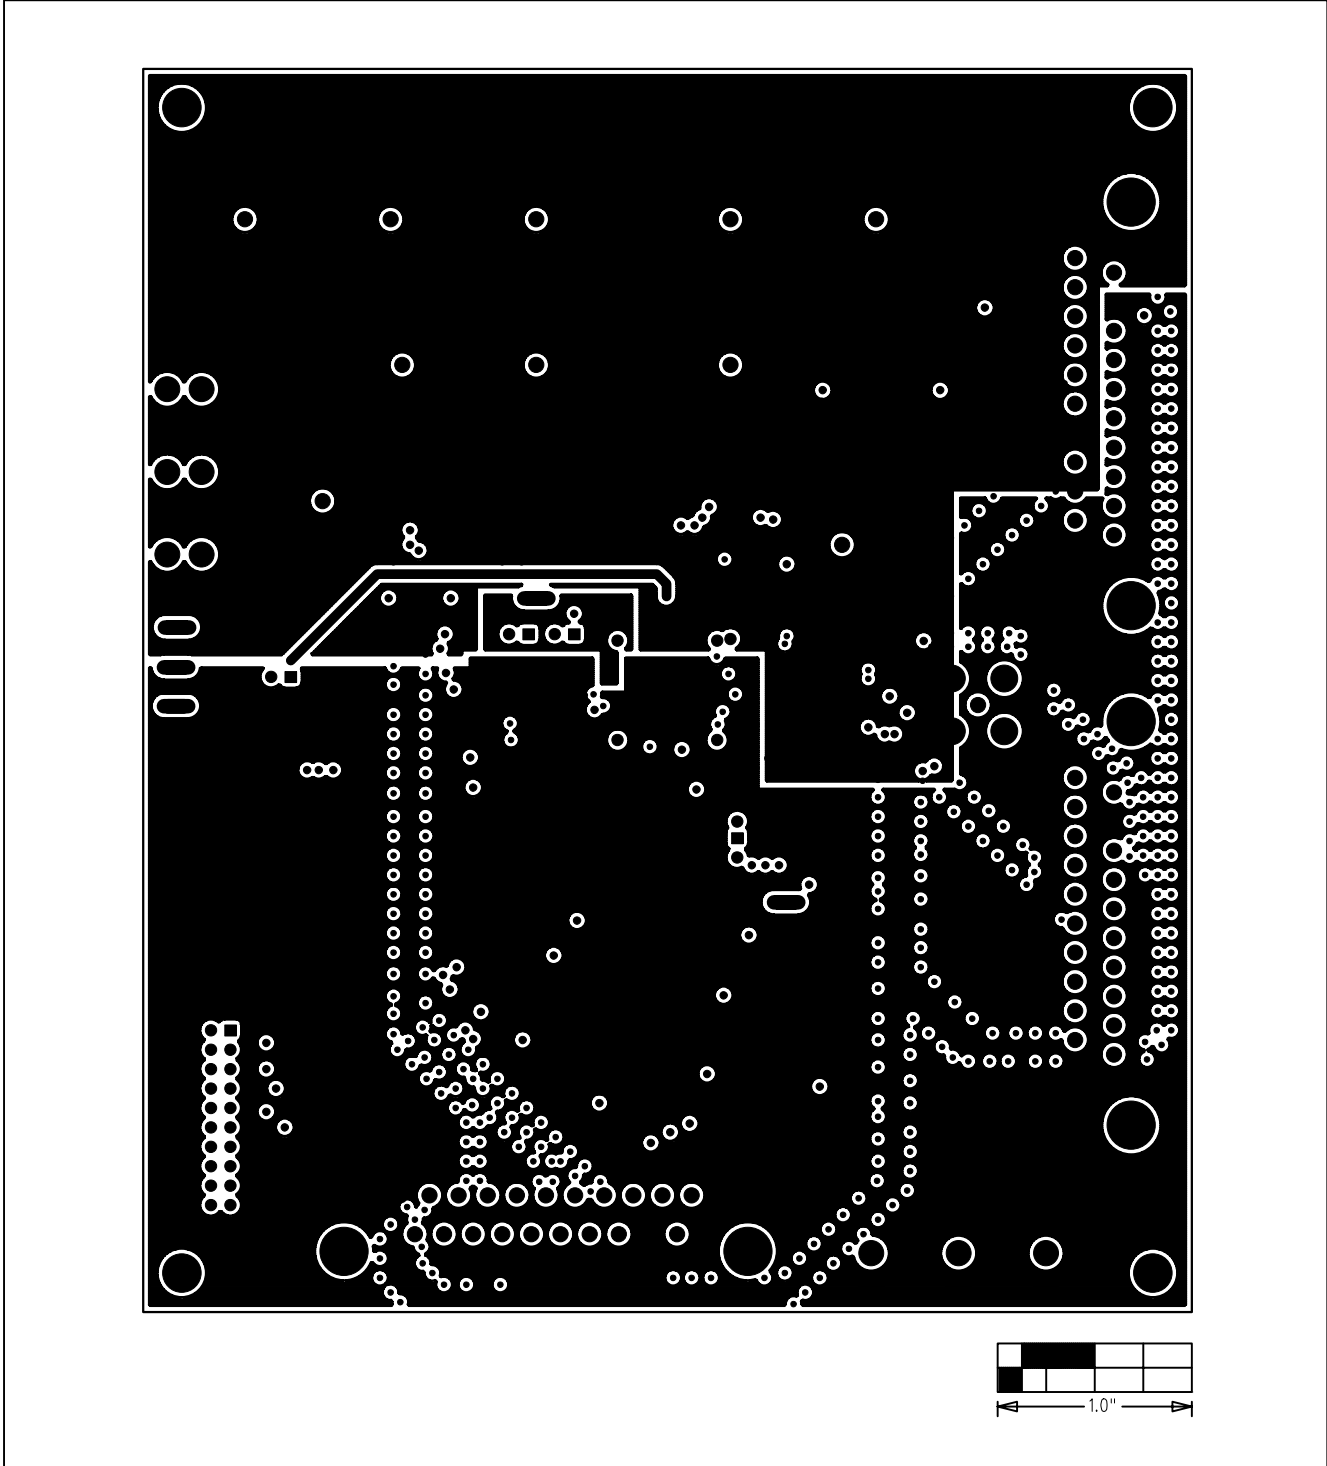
MAX4399 EV Kit PC Board Layout—Inner Layer 3
